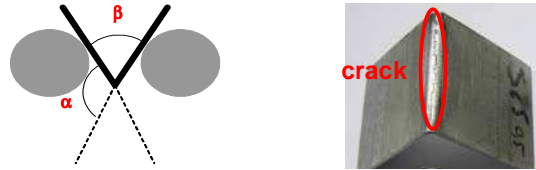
V-bending test. Left: schematics; right: V-bending specimen after cracking
